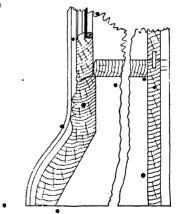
Enlarged Section through Lower Part of Sectional Bookcase.
